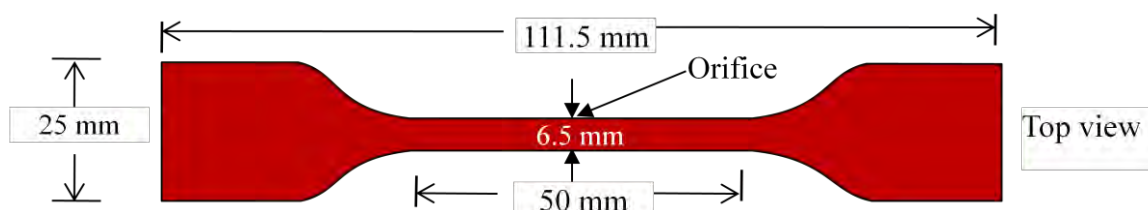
(a): Dimensions of a dumbbell-shaped die
